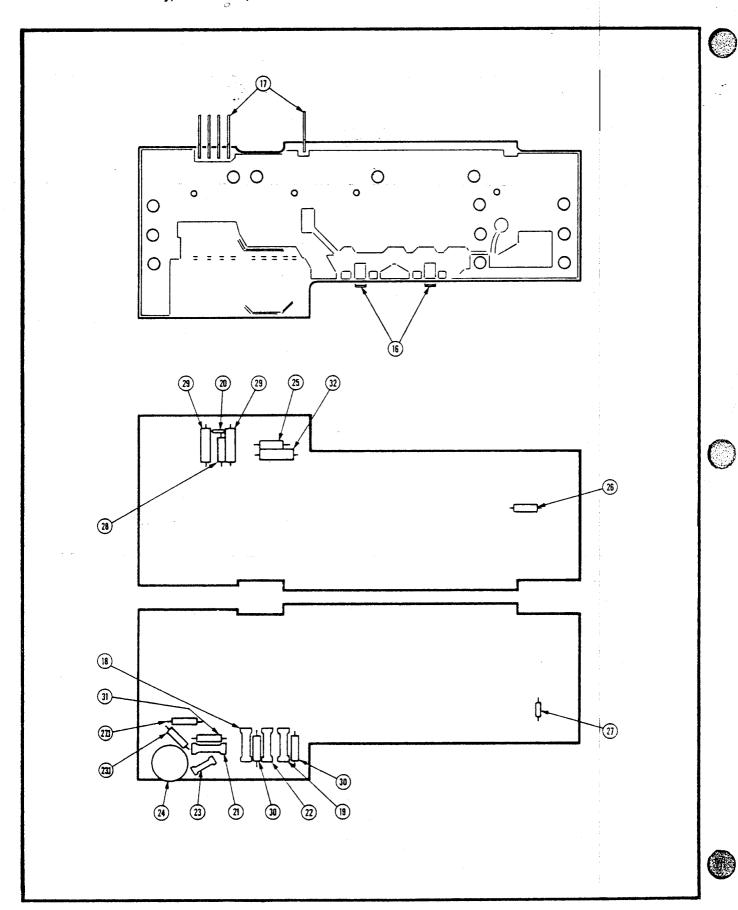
A3 Circuit Board Assembly, Cam Switch, Channel 2 (sheet 2 of 2)
